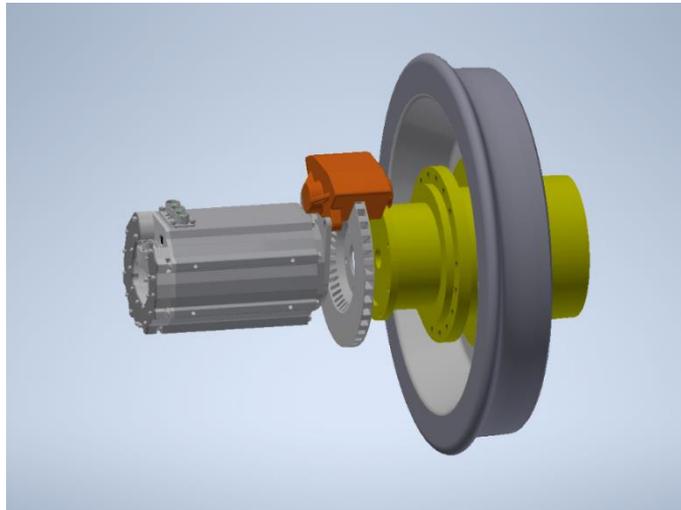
The E2 solution with motor and drive unit. Same integration of brakes and the motor is both smaller and less powerful compared to E1.
